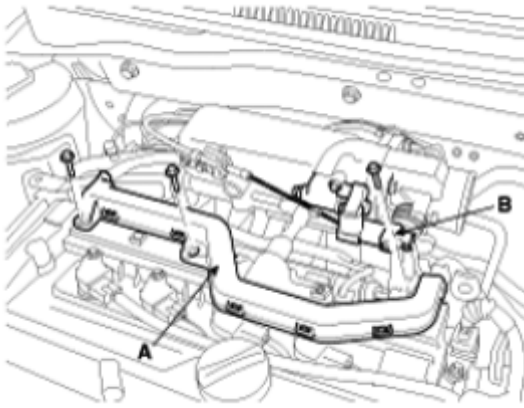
Identifying Wire Harness Bracket And ISA (Idle Speed Actuator) Connector
